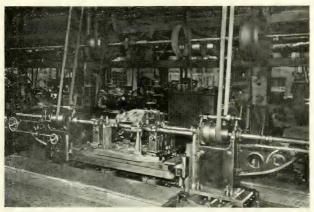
BORING FIELD FOR ARMATURE AND AXLE BEARINGS
